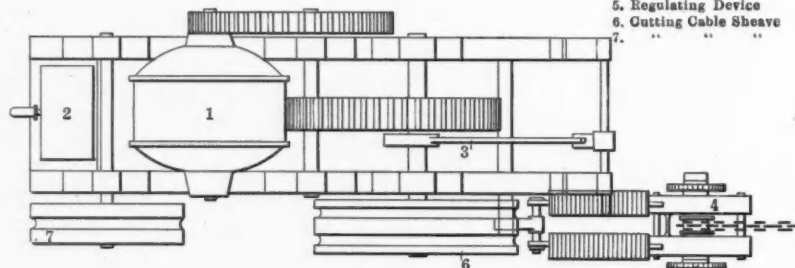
TOP VIEW OF ELECTRIC CUTTING MACHINE
